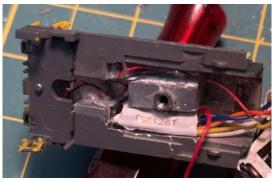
Metal end-piece of locomotive with milledout space for DZ-126T decoder.
